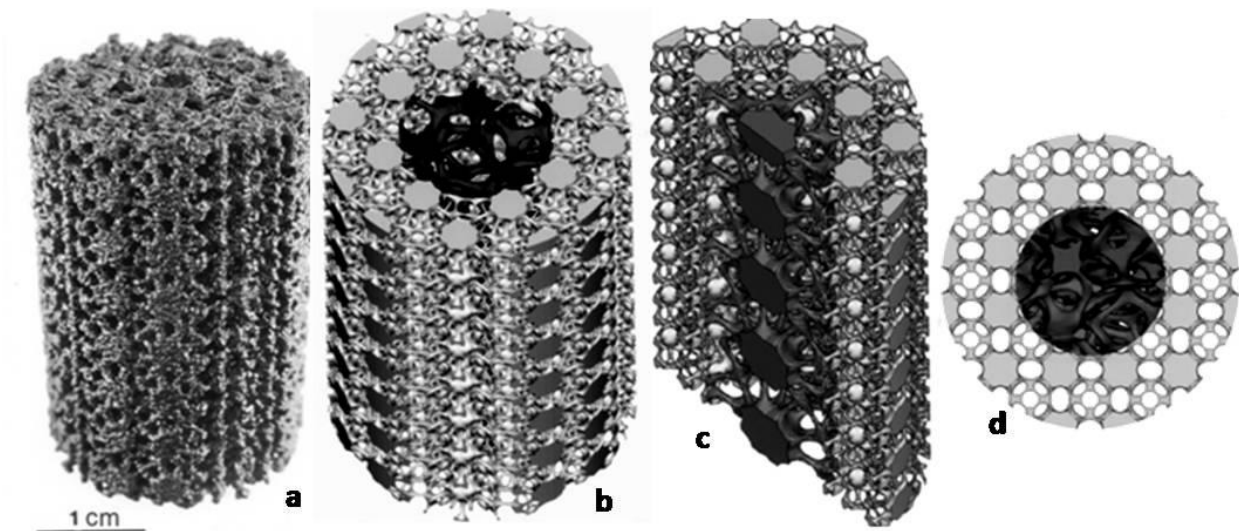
Fabricated and CAD designs of cylindrical components
